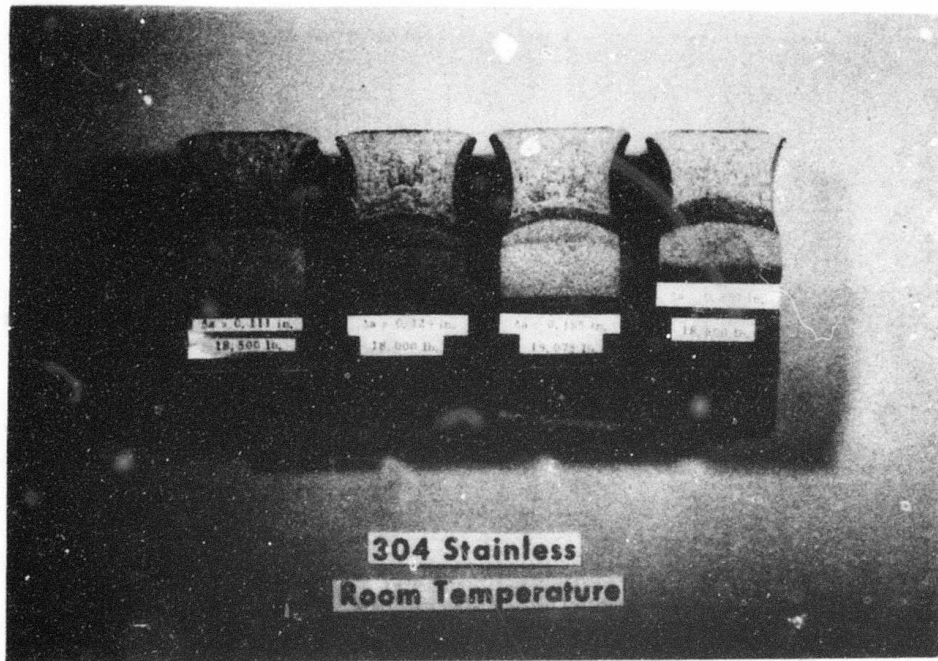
Fracture Surfaces of AISI 304 at 298 and 77 K.
